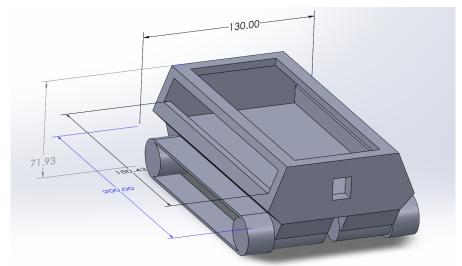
Rover Chassis SolidWorks Model with Dimensions in Millimeters
